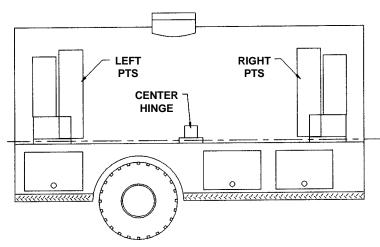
ALIGNMENT OF CASTING SETS
